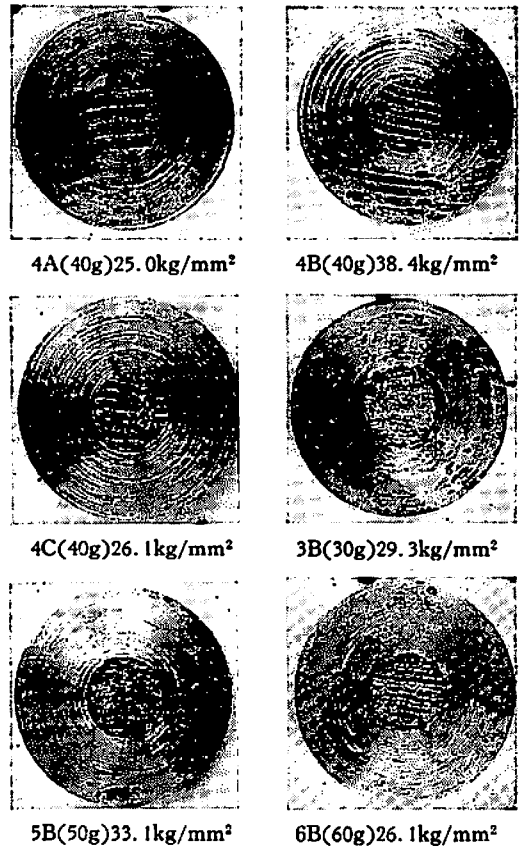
Separating appearance at bonded surface (stainless steel-mild steel explosive welding)
